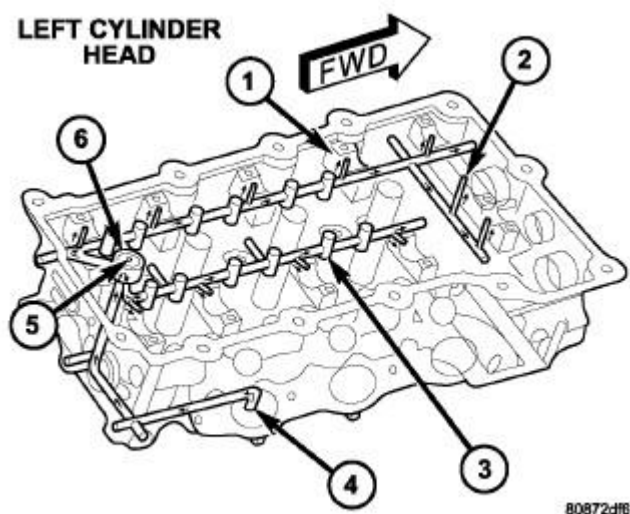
Cylinder Head Oil Lubrication System - Left Side
